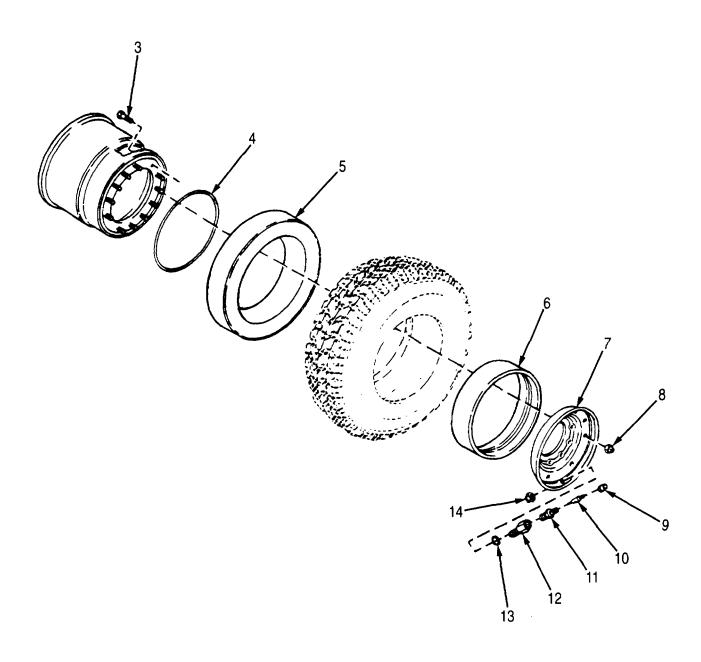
Wheel and Runflat Assembly (M101A3 and M116A3)
